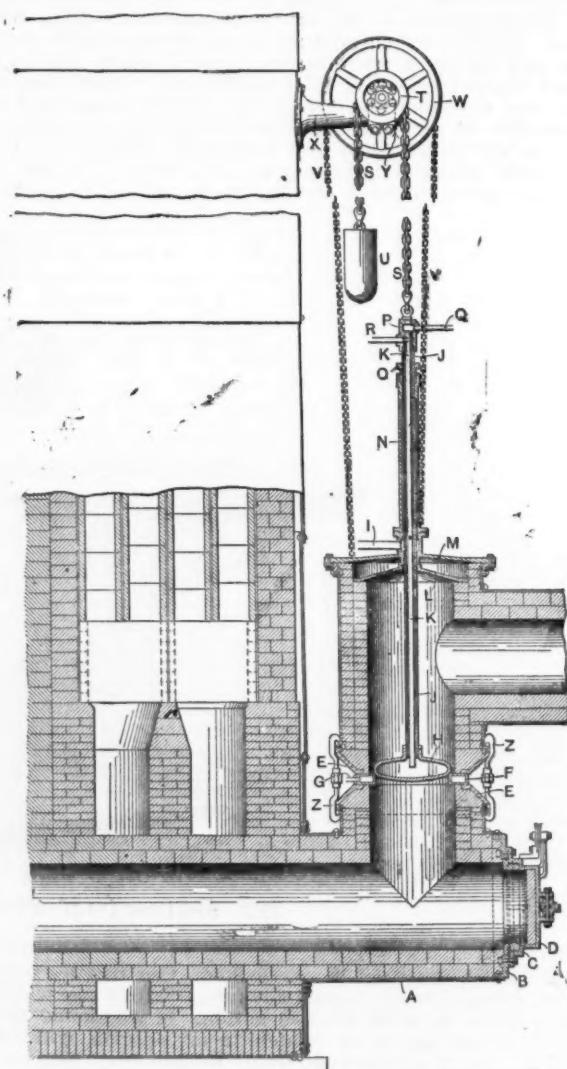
Section of the Kennedy Hot Blast Valve.
